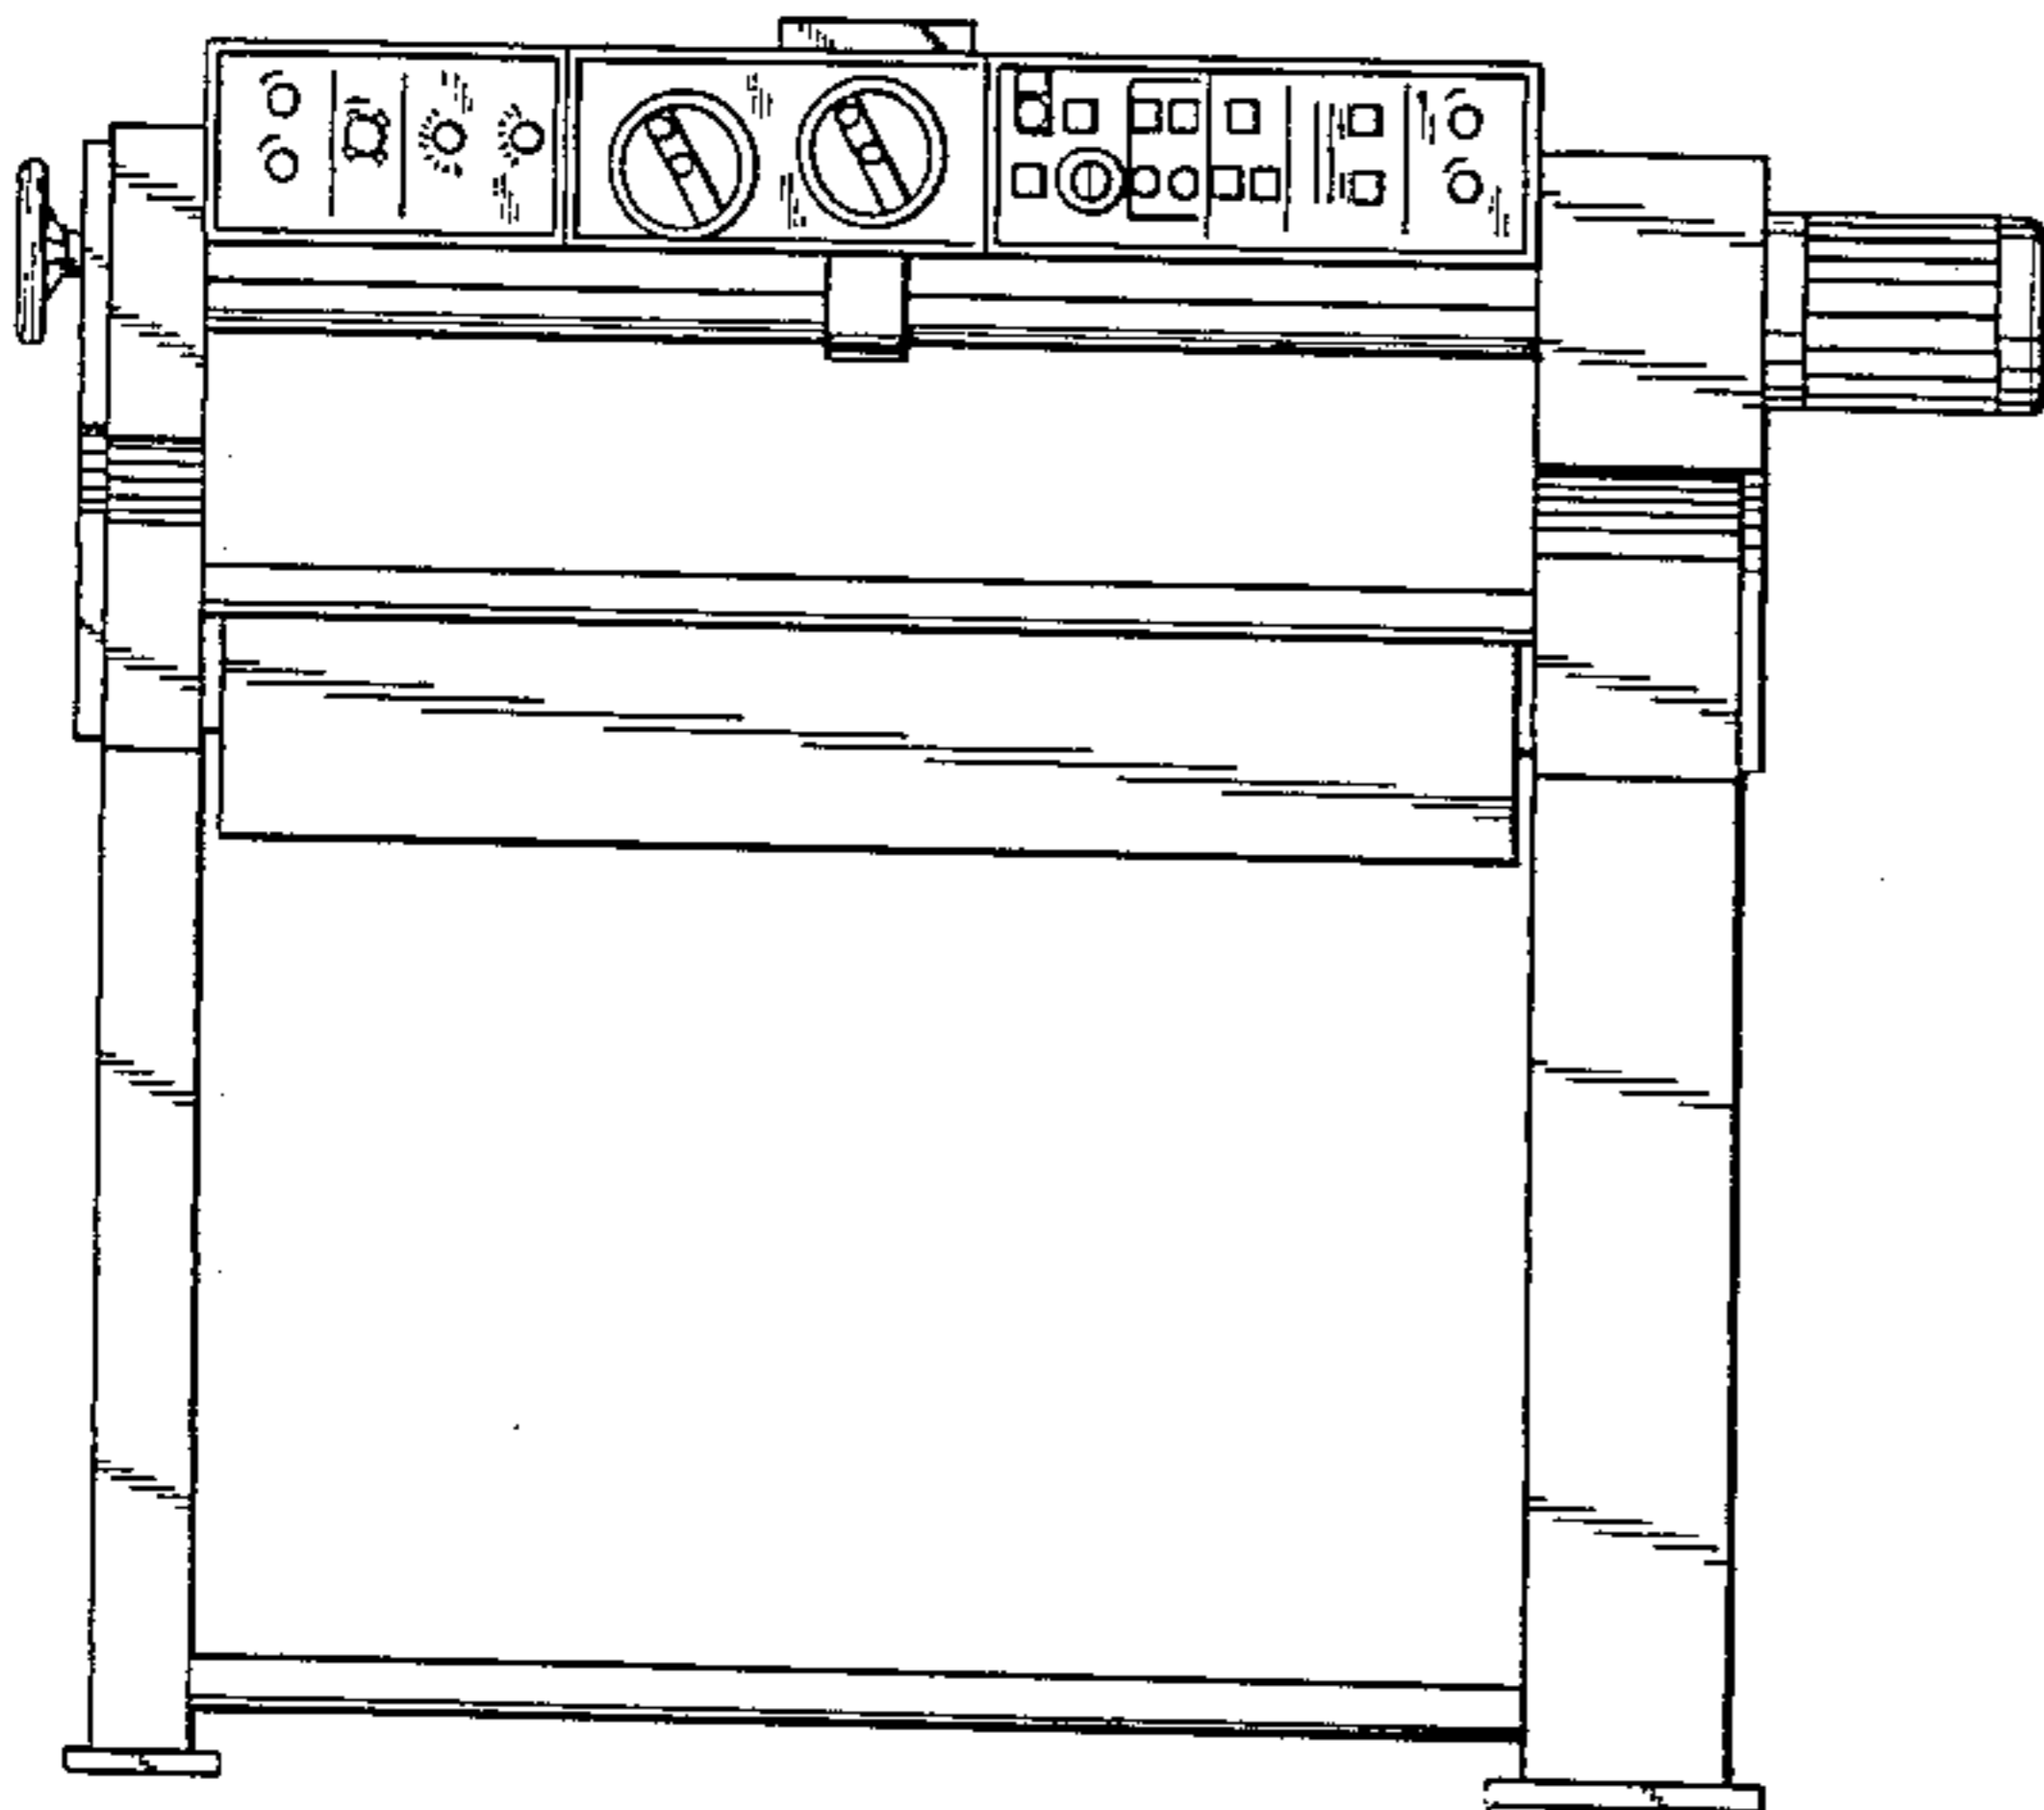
is a front elevational view of a remote control desk for multicolor printing machine embodying our new design;
